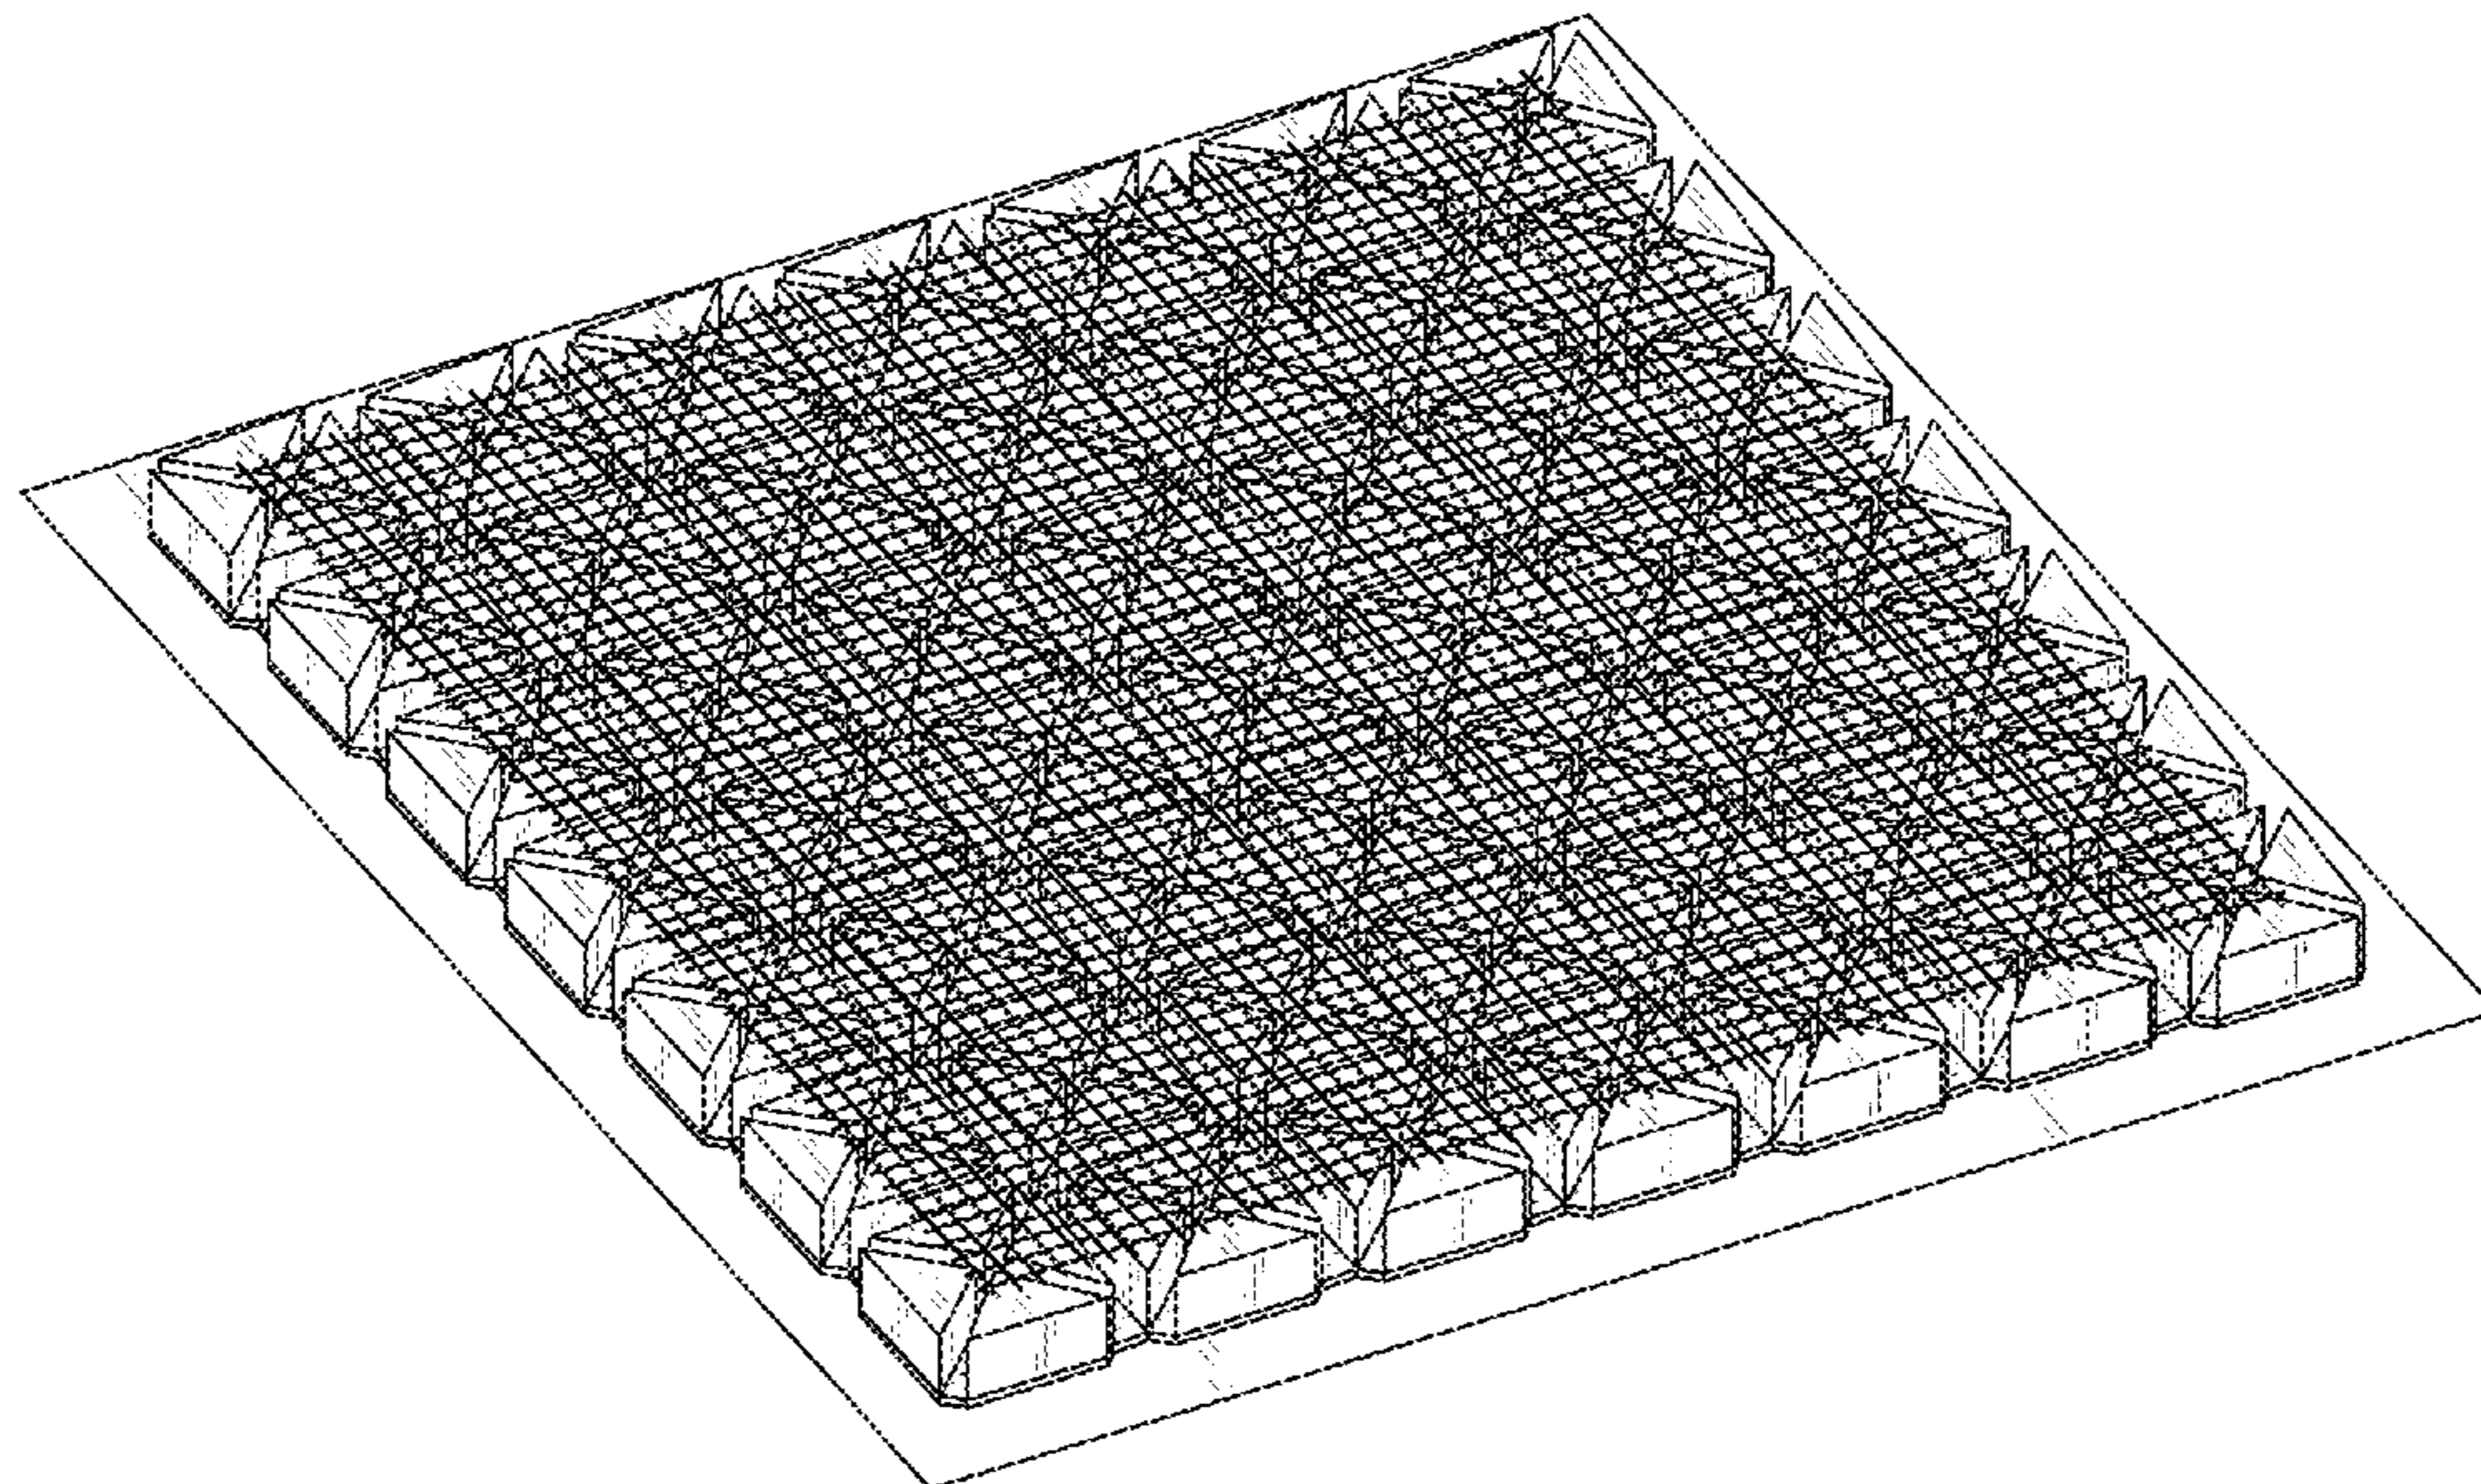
is a bottom view of the abrasion-resistant cuttable self-adhesive industrial tile;
